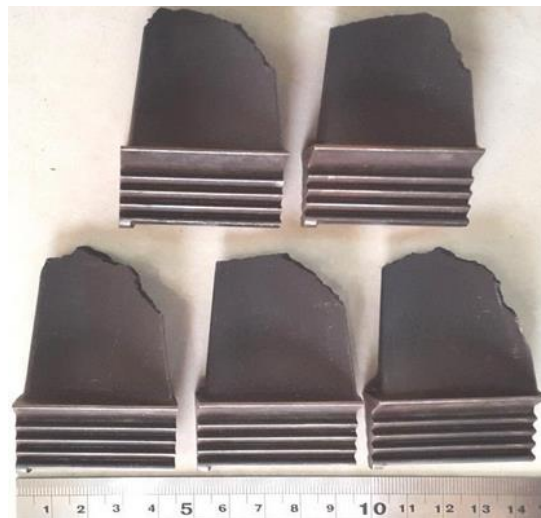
Damaged Rotor Blades of First-Stage Turbine Blades After 6500 Hours of Operation at About 750-800 deg C a 6.5 MW Gas Turbine [11]
